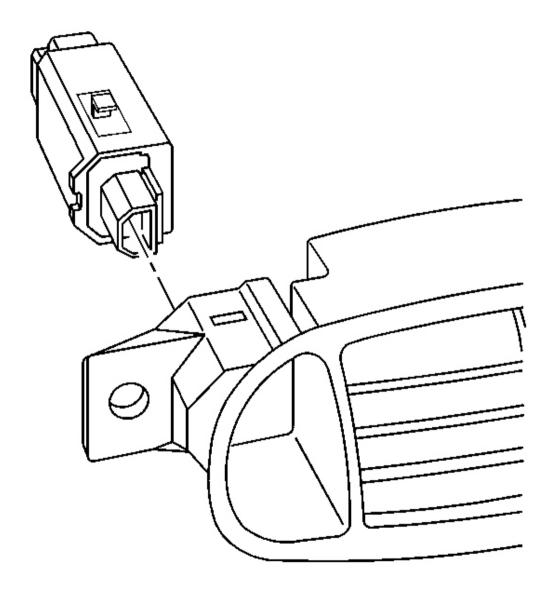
Center Air Outlet To IP Upper Trim Pad Courtesy of GENERAL MOTORS CORP.
